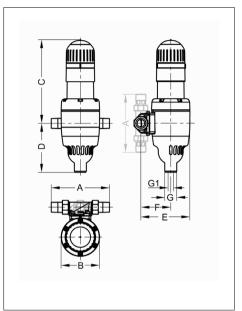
Installation dimensions JPF+ 3/4" - 11/4"
